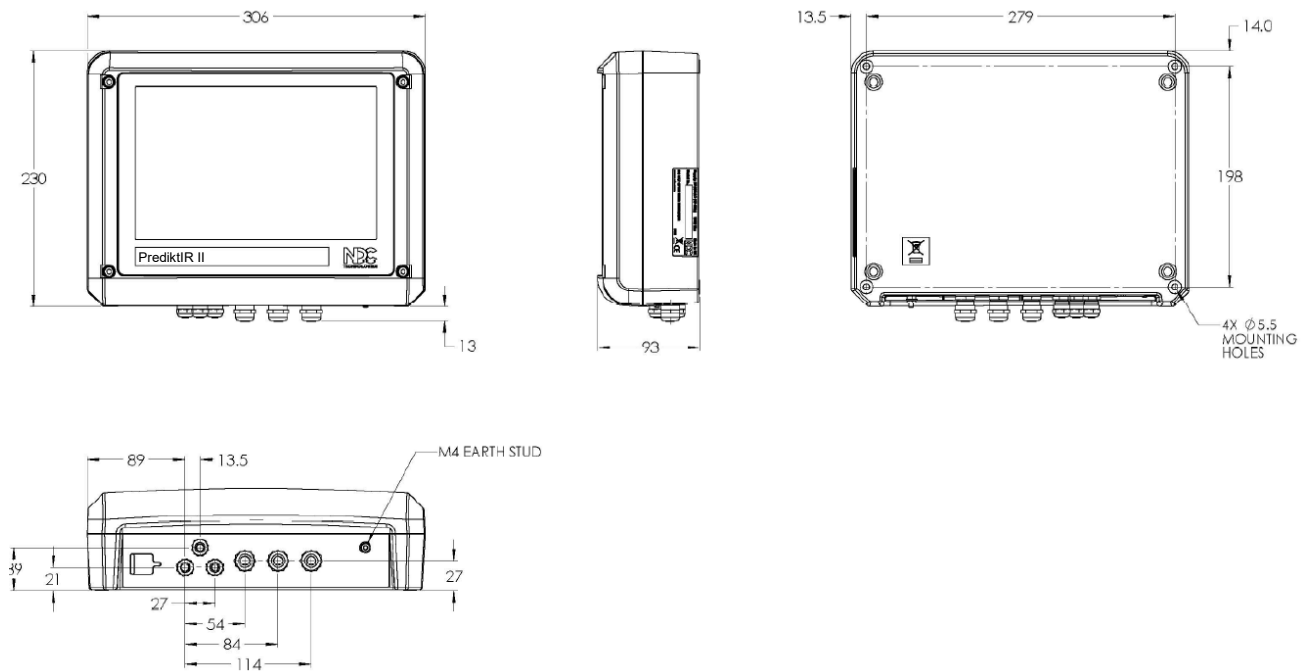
Stainless Steel PrediktIR II GCI Outline Drawing
